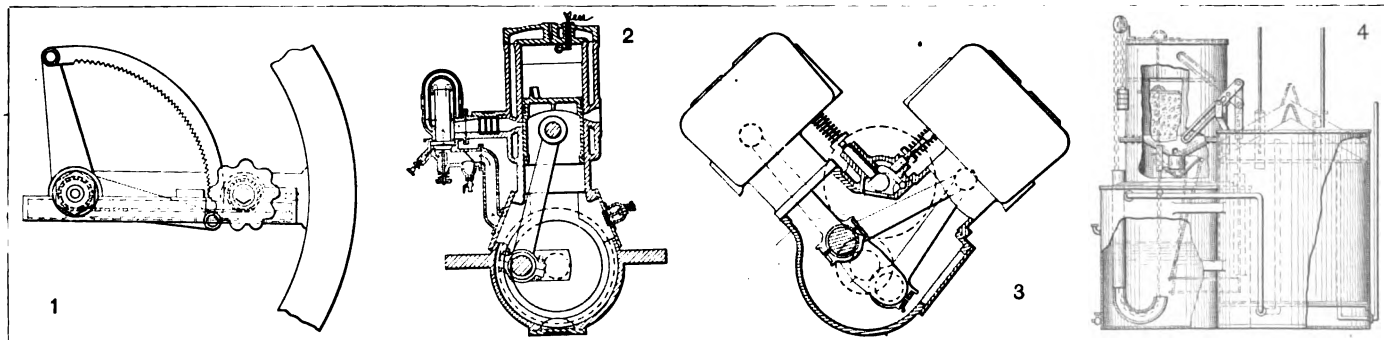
Coffin steering mechanism. Fig. 2—Riegels' liquid fuel engine. Fig. 3—Belknap-Swartz motor. Fig. 4—Angermeier acetylene generator
